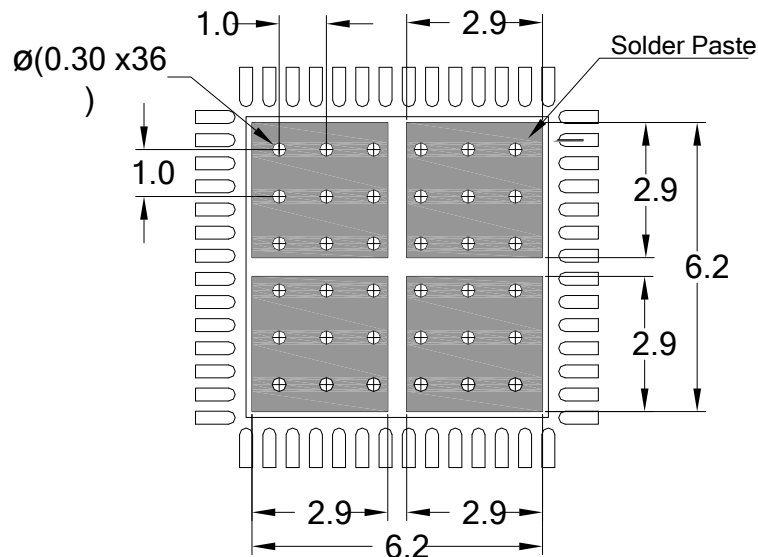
PD69204T4 Top layer Solder Paste and Vias Recommended PCB Layout for Thermal Pad Array (mm)
